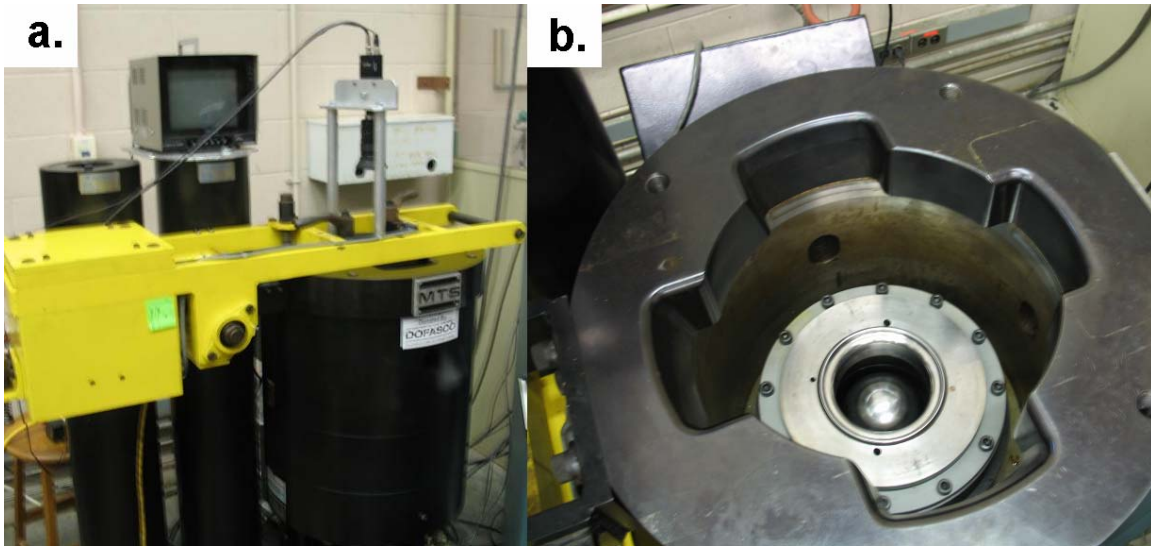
a.) Dome testing machine. b.) Clamp and punch head view of dome testing machine.
